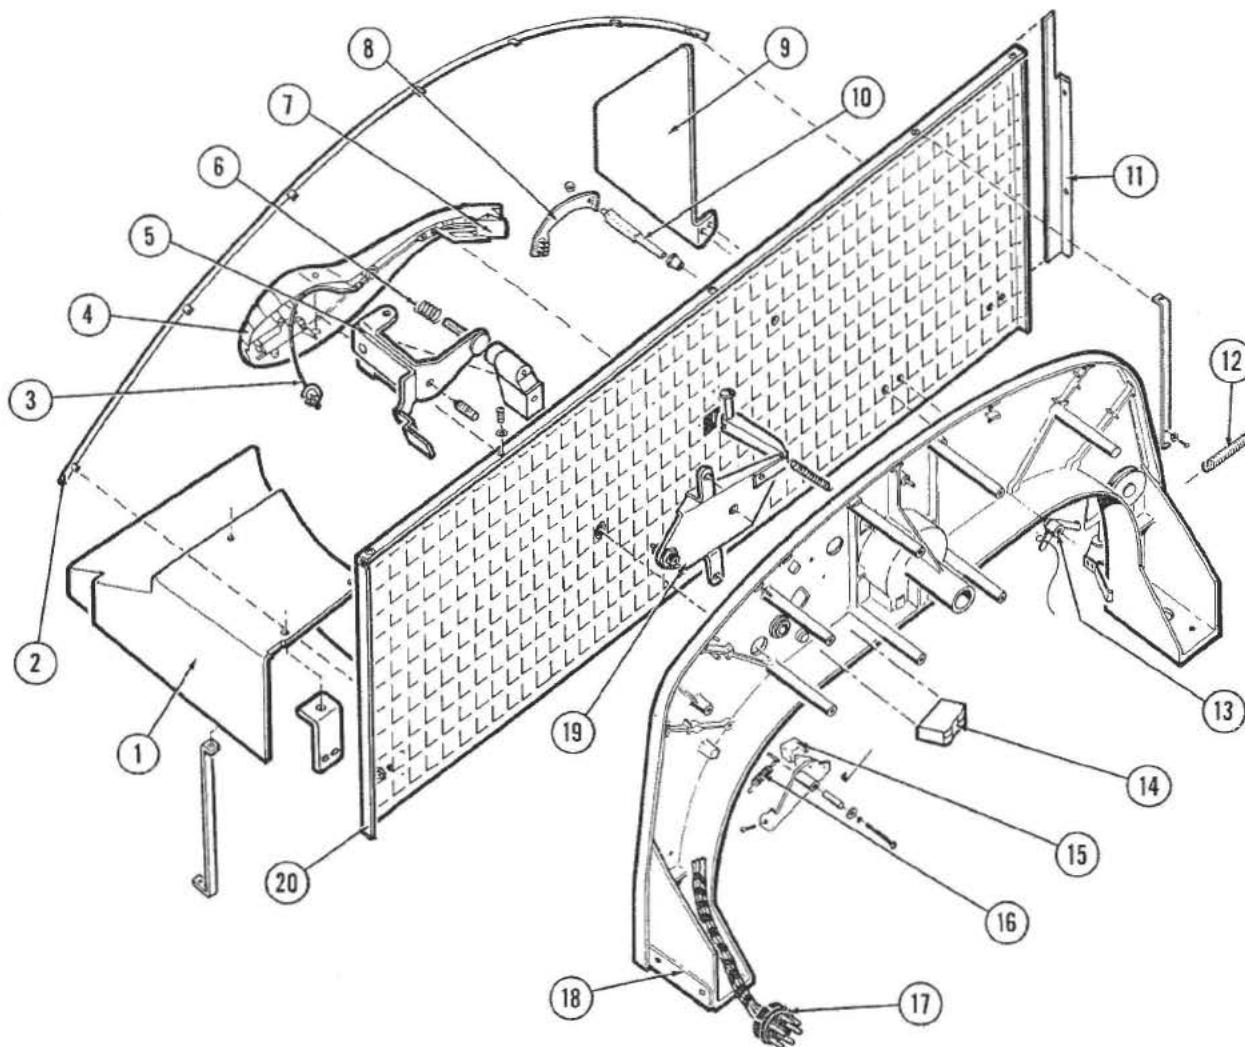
TOP SUPPORT CASTING ASSEMBLY
